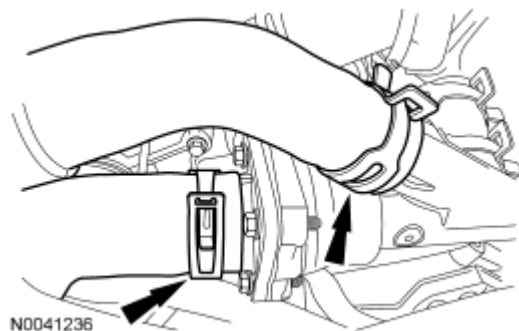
Locating Upper And Lower Radiator Hoses From Thermostat Housing
